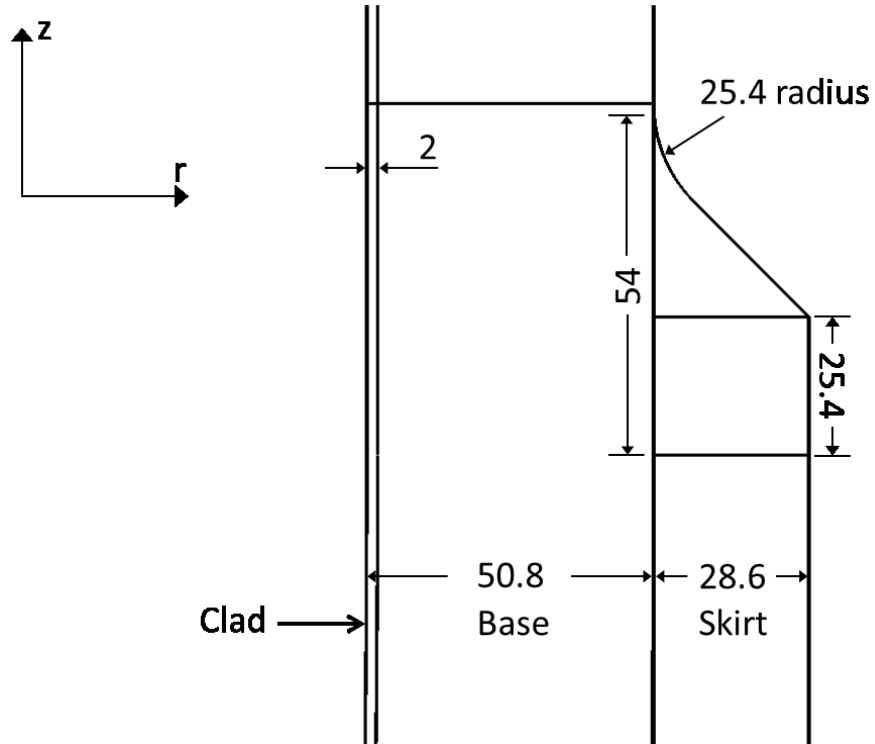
Detailed dimensions of junction weld. Values in mm.
